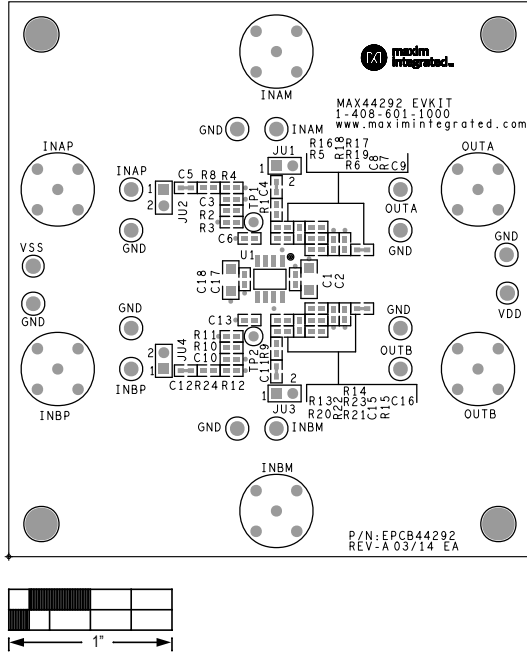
MAX44292 EV Kit Component Placement Guide—Component Side
